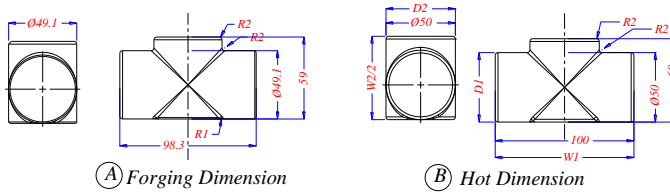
A- Forging Dimensions, B- Hot Dimensions
